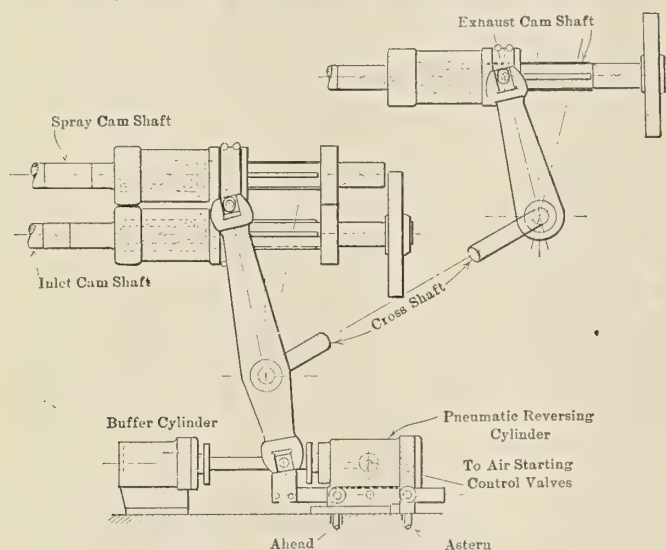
Four-Cycle Engine Reversing Mechanism
